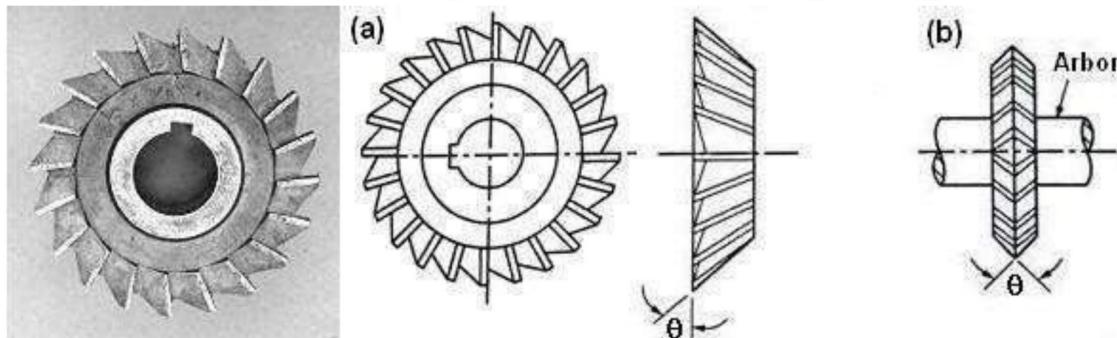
(a) Single angle milling cutter and (b) Double angle milling cutter
